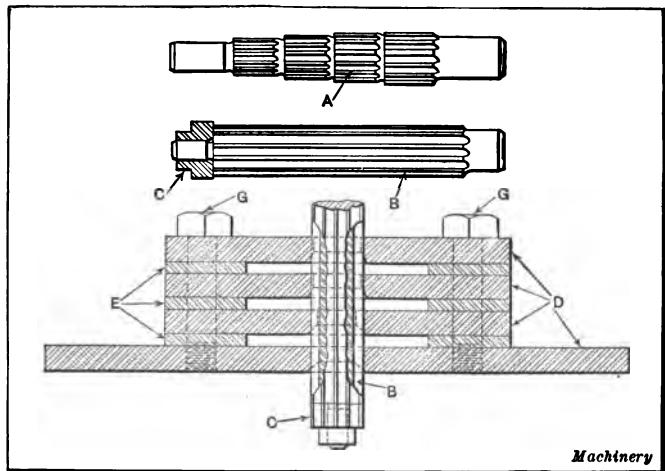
Broaching Dies for cutting Spur Gear Teeth
